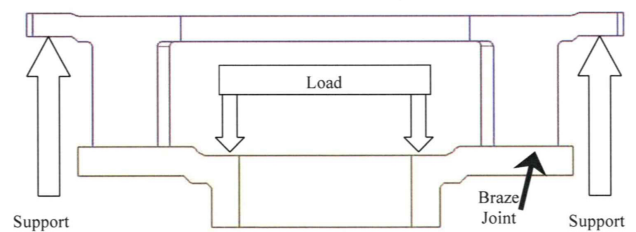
Schematic of sinter braze carrier assembly tensile test used to gather data presented in Table 3.
